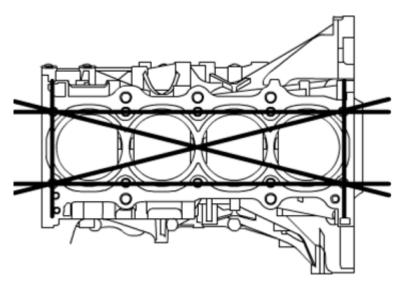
Inspecting Cylinder Block Courtesy of SUZUKI OF AMERICA CORP.
